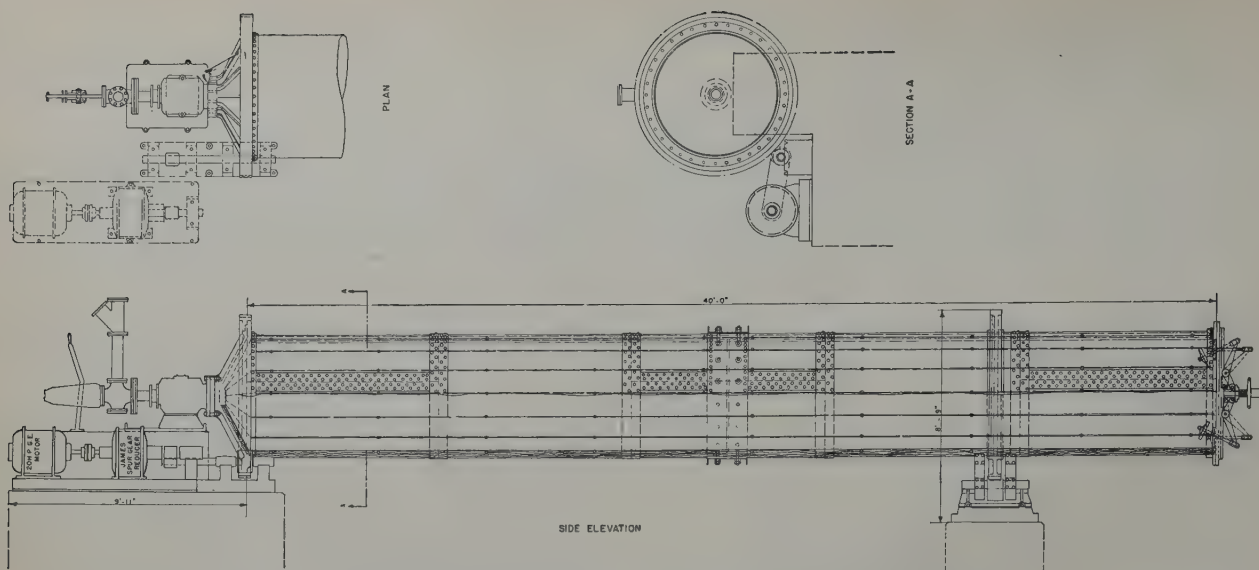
Side elevation and plan view of filter. Riveted construction.
